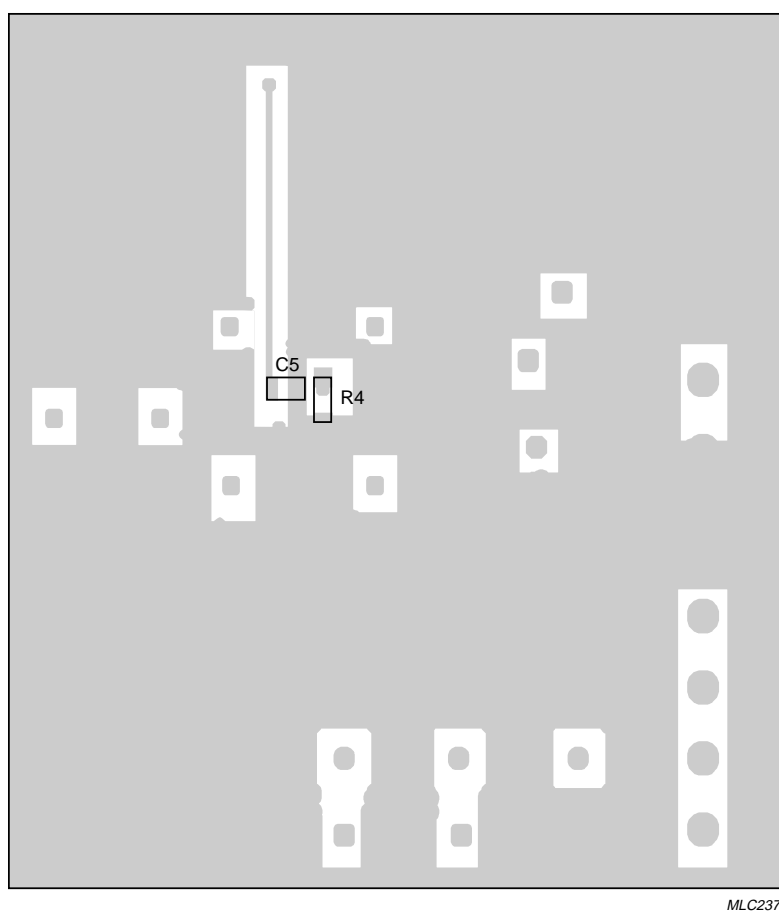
PCB bottom view with components for LQFP32; test circuit Fig.5.
